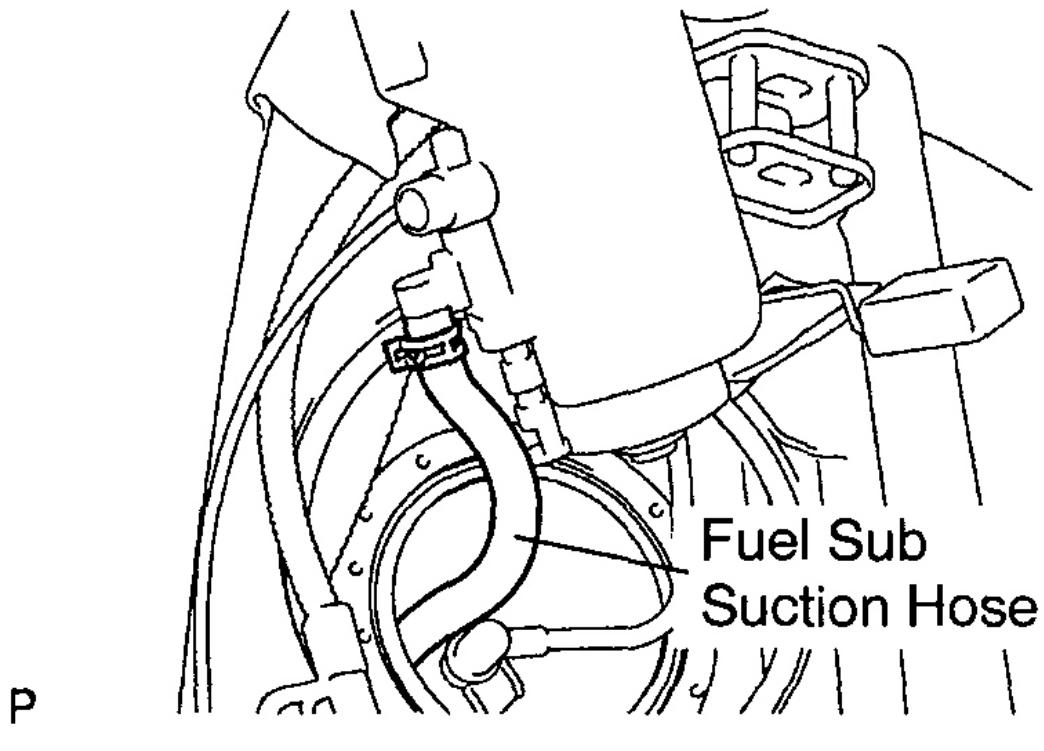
Disconnecting Fuel Sub Suction Hose From Fuel Return Jet Tube
